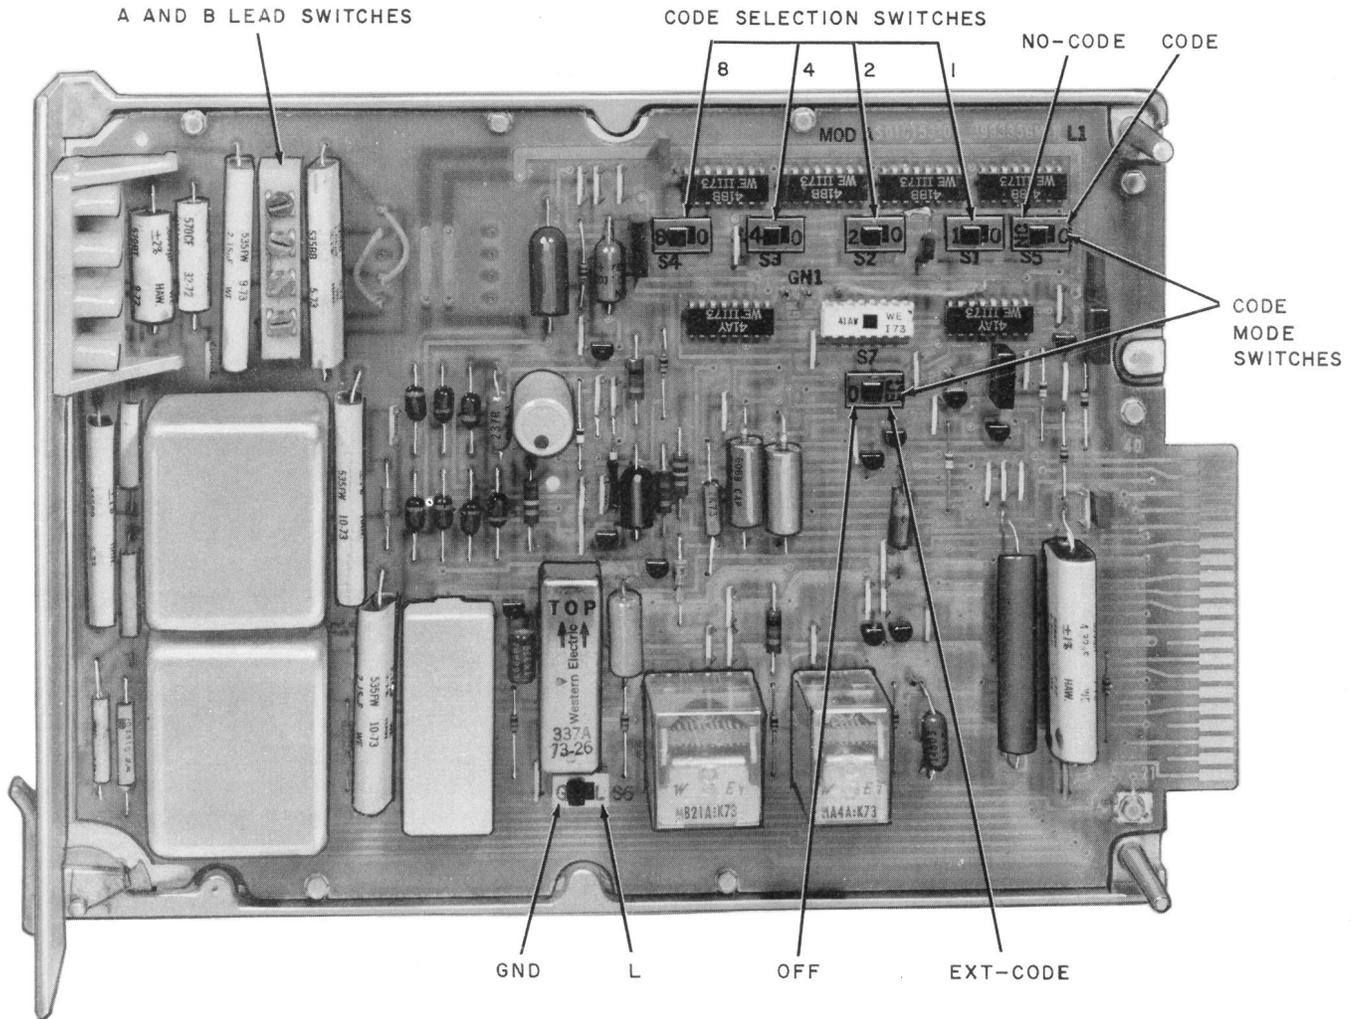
FGM PC Assembly Showing Coding and Impedance Matching Switches
